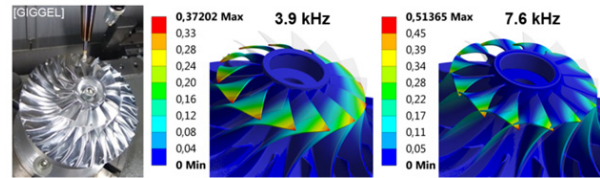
Workpiece vibrations of the blades of an exemplary impeller (Al7075, D = 200mm, h = 65mm)
